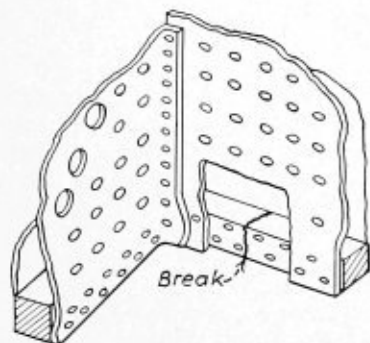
Showing Part of Side Sheet Removed and Break in Mudring
